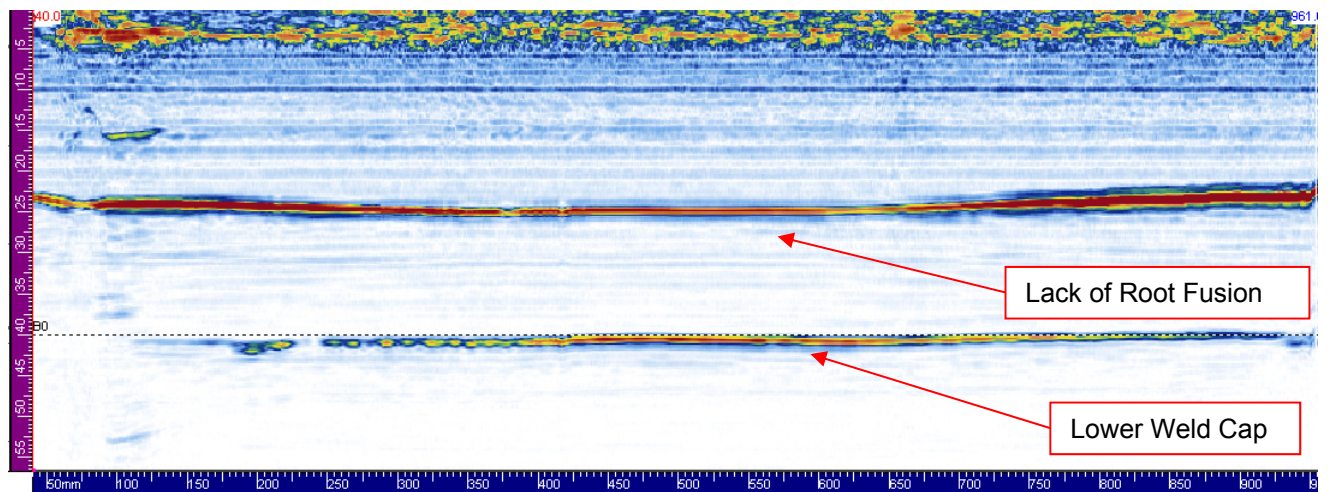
Typical scan of butt welded sample with cold weld flaw showing lack of root fusion.
